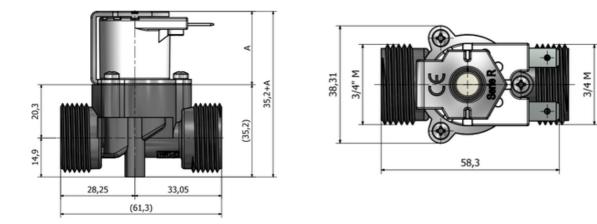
Dimensions of the valves in the R Mini-611 series
